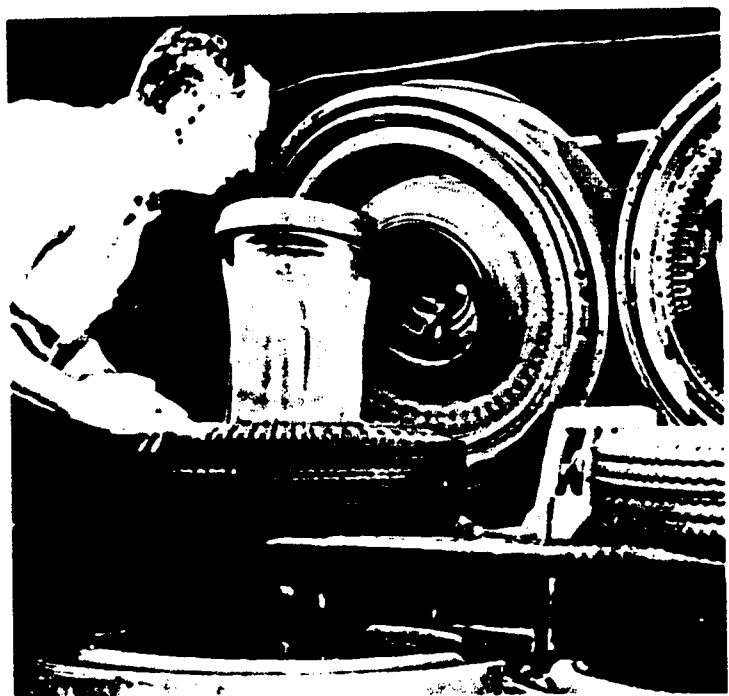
You must open up some molds to remove the molded part. Many tires can be made from this pair of molds.
